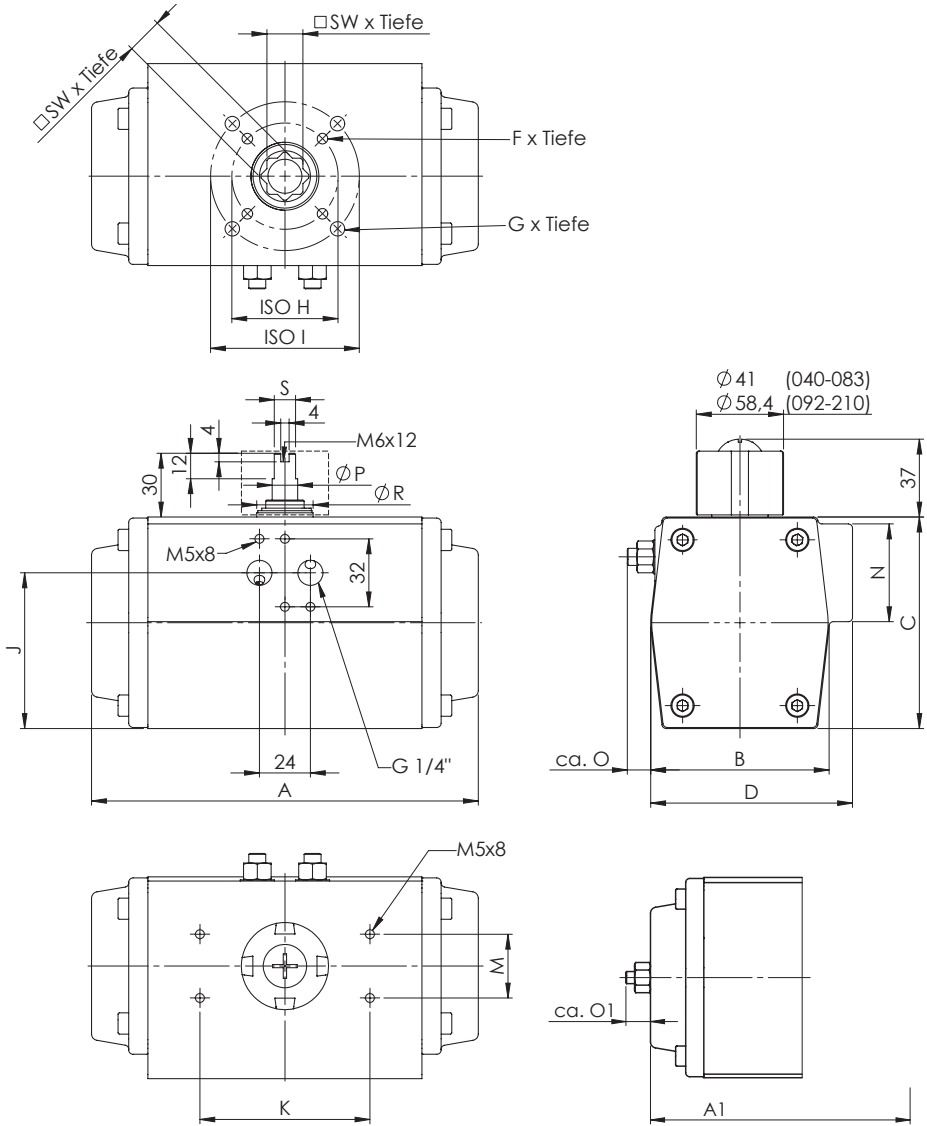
Dimensional drawing type GDA/GSR-040 till 210
